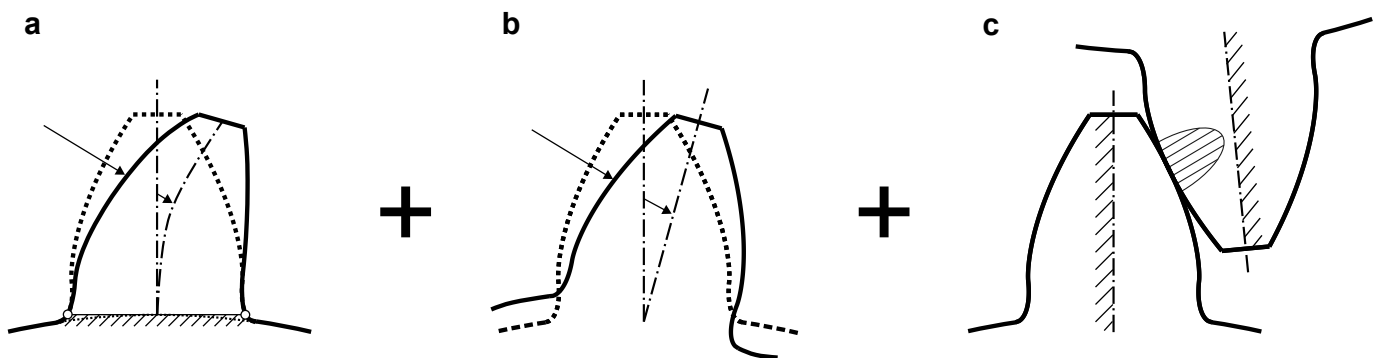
Components of tooth deformation (stiffness) according to Weber and Banaschek (Ref. 7): a) Tooth bending deformation with clamped tooth root; b) Tooth tilting deformation with stiff tooth (gear body deformation); and c) Contact point deformation.
